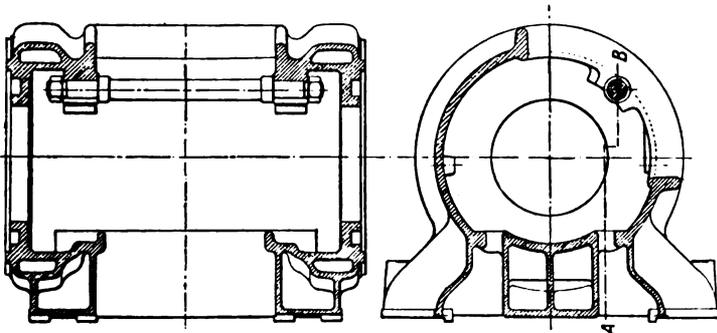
Intermediate casting or distance piece, Koerting.
